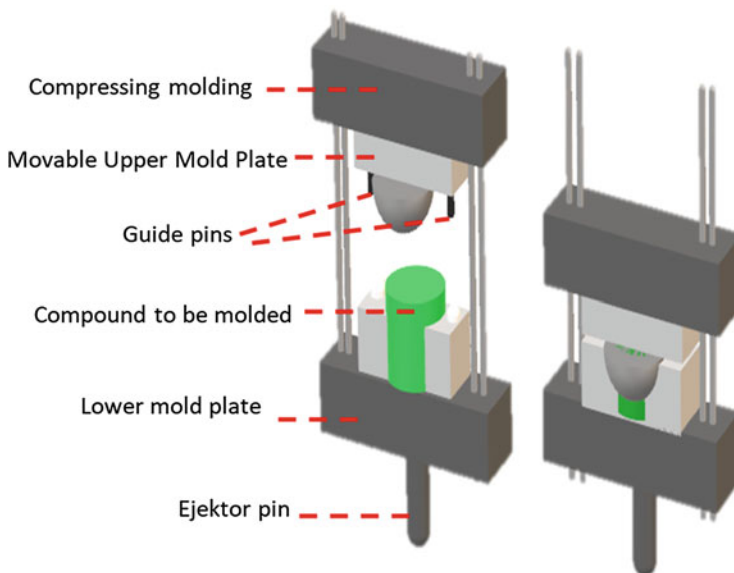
Schematic compression molding machine. (Adapted from Syed 2016)
